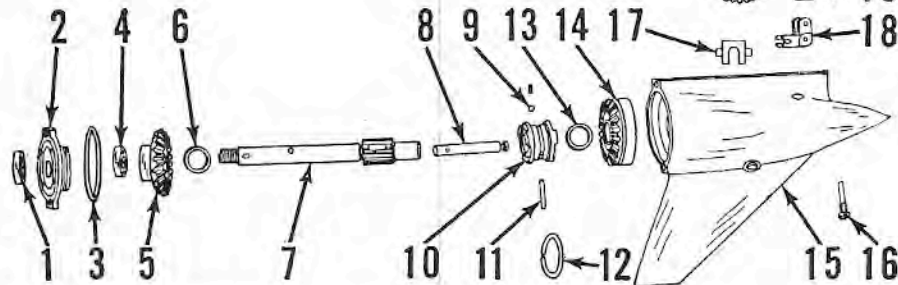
Exploded view of lower unit gearcase, drive shaft housing and associated parts used on late models.
